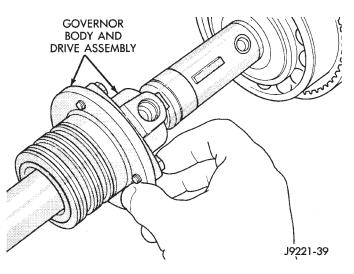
Removing/Installing Governor Body And Drive Assembly
